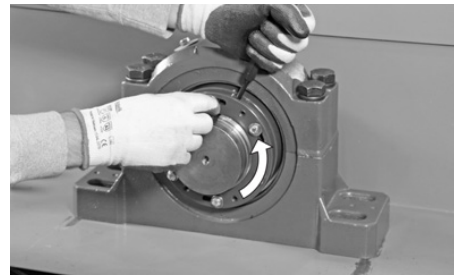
Holding External Nut and Rotating Internal Nut Using Hex Head Bolt
